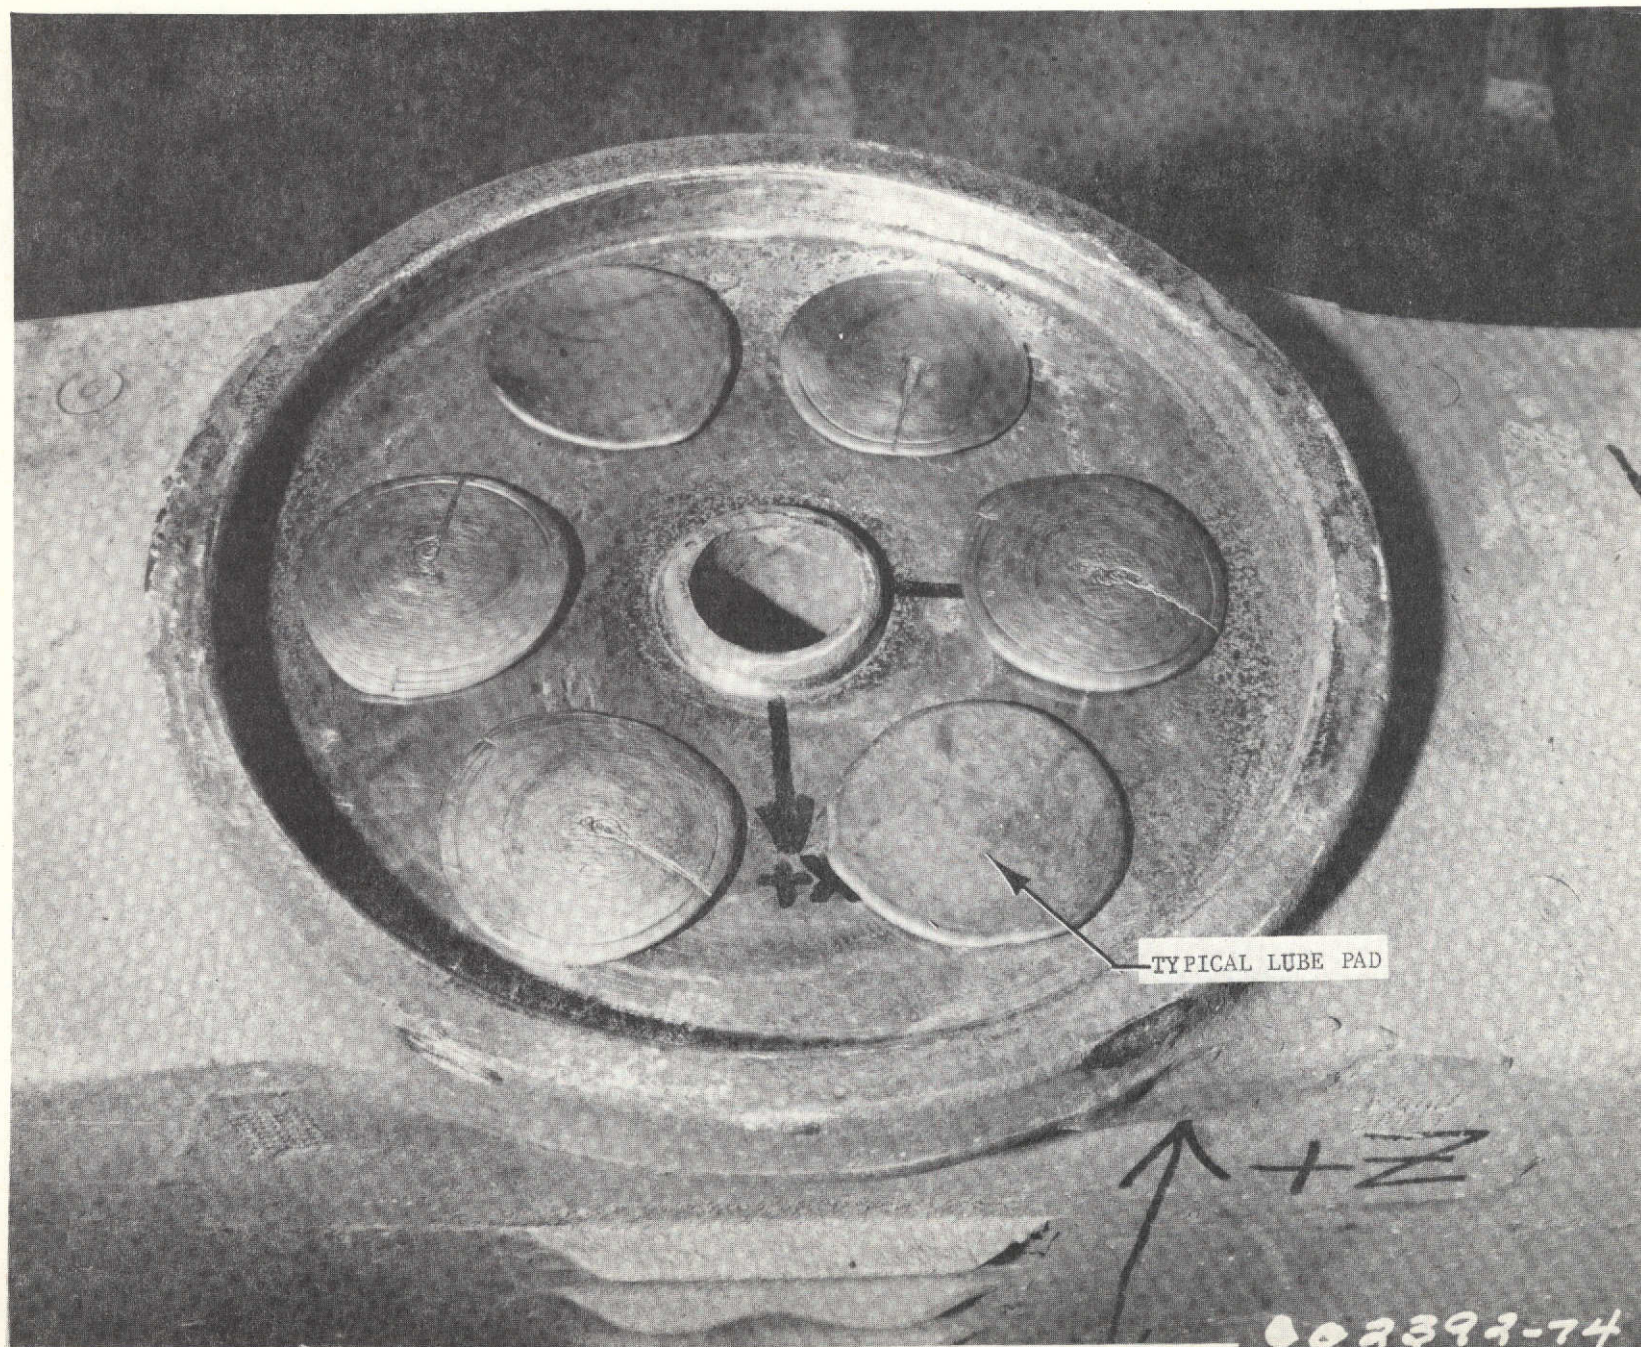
BOLSTER/BODY CENTER PLATE INTERFACE CUP WITH LUBE PADS
